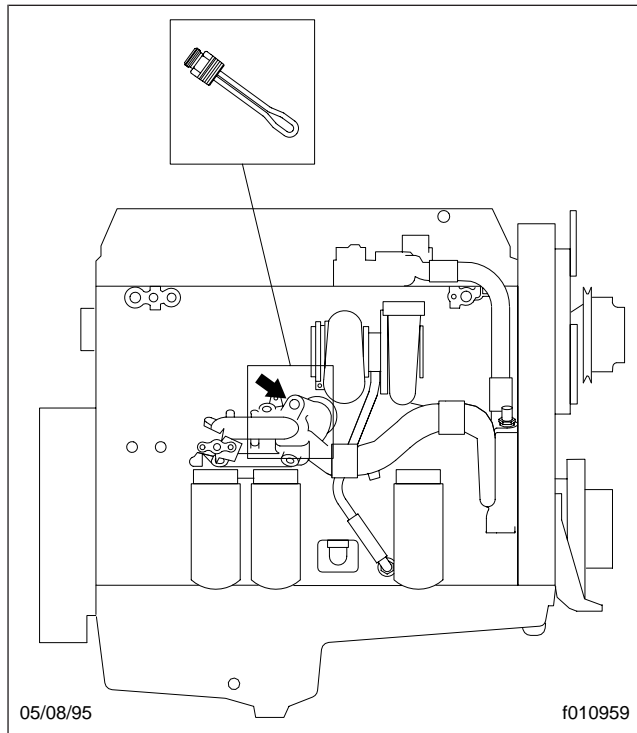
, Block Heater Element Installation (Detroit Diesel Series 60 engine)
